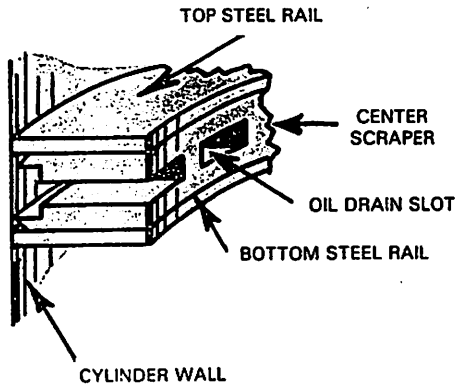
Three-piece oil ring. Top and bottom rails are made of steel.
